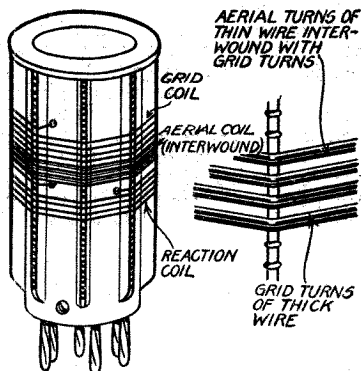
This shows the arrangement of windings for a six-pin plug-in coil.
